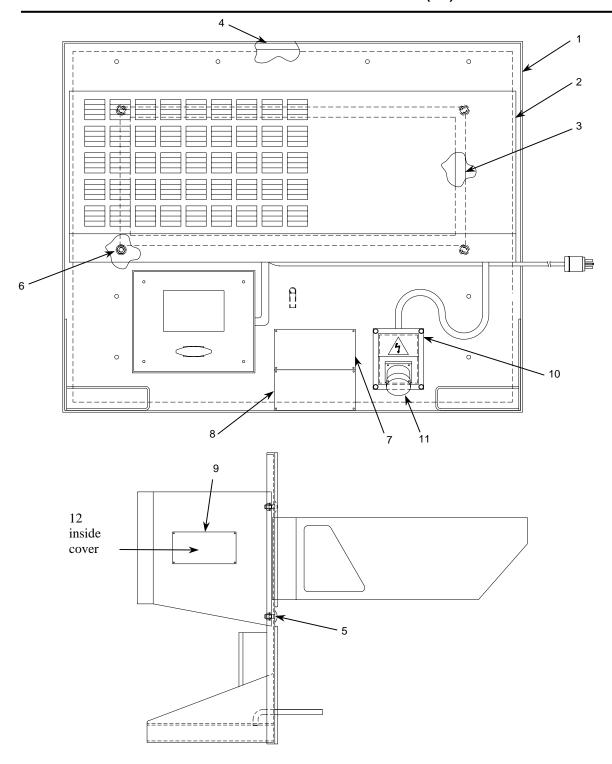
ADR-300 RU Assembly. 0056 00-(1 Blank)/2
